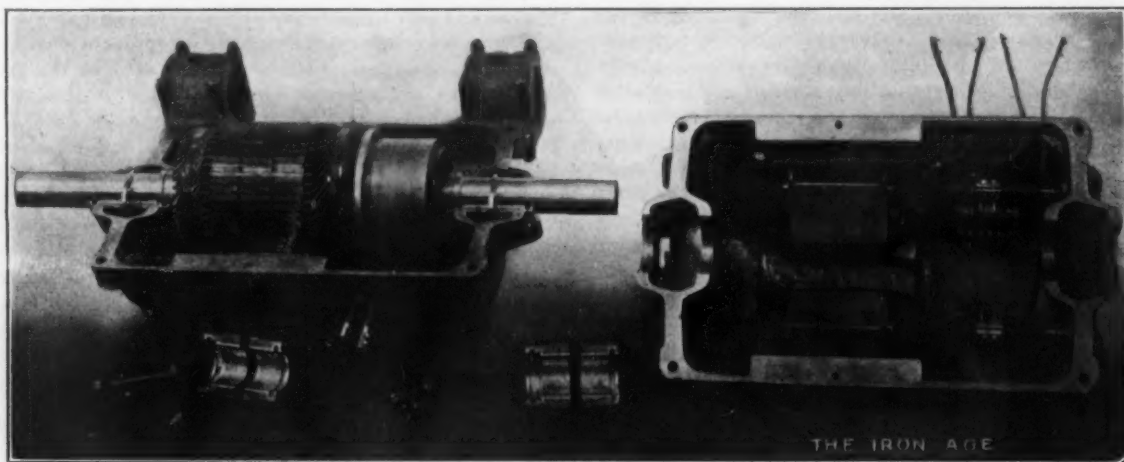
The Form W Motor Opened, Exposing the Interior.
